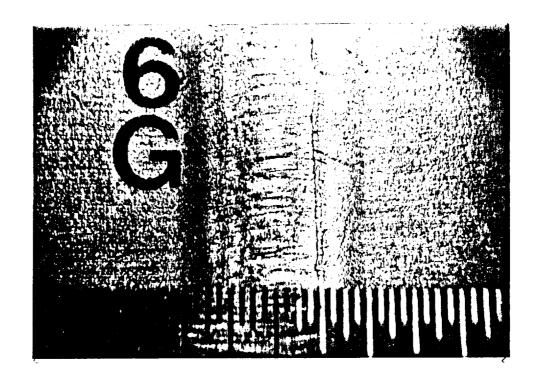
B Weld made with pure gas. Cover. Back.
